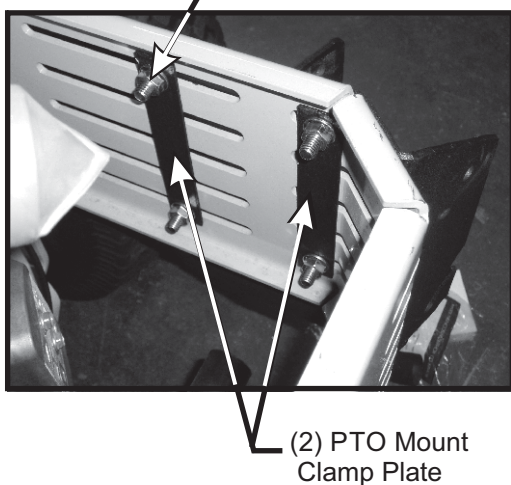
(4) 3/8"-16 Flange Nuts
